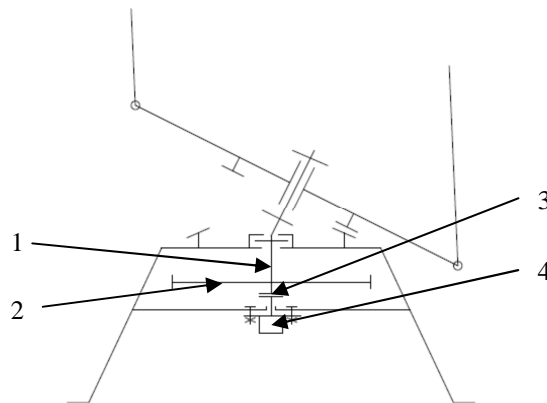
RPM sensor: 1- Output shaft (crankshaft), 2- flywheel, 3- rubber coupling, 4- RPM sensor
